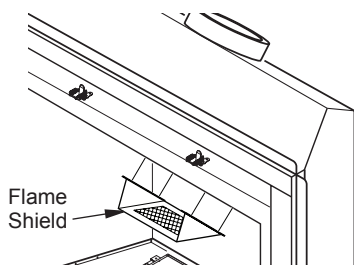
Remove Flame Shield (Flame Shield Will Vary by Model)
